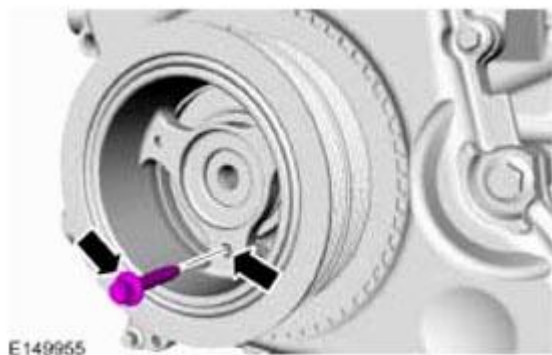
Installing Standard Bolt Through Crankshaft Pulley TDC Guide Hole And Into Engine Front Cover TDC Guide Hole
